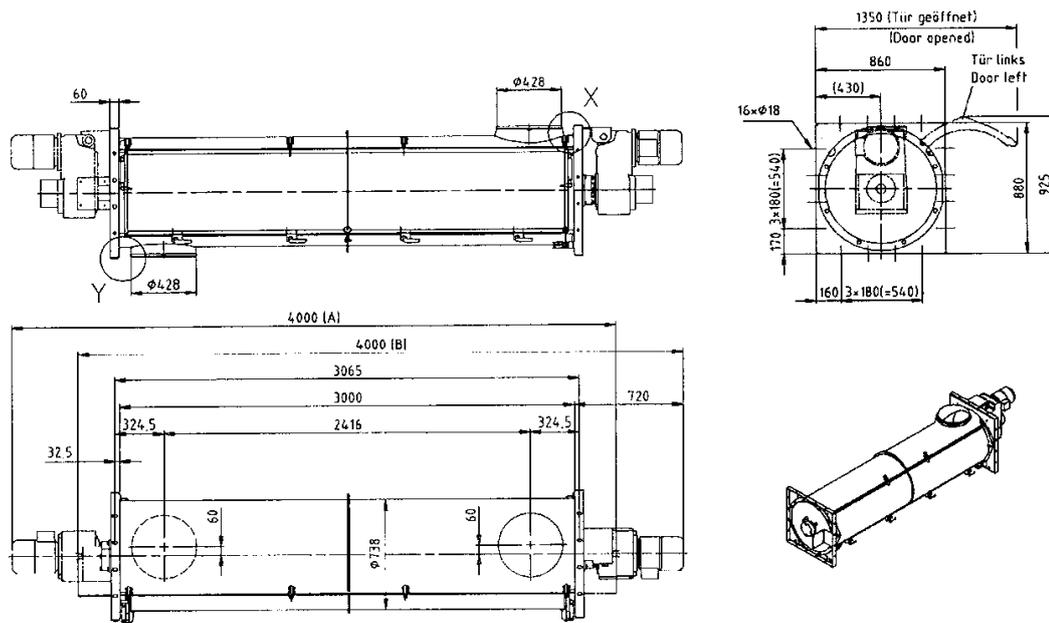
Dimensioned drawing Retentioner 1300 left
